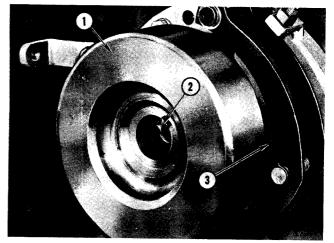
REMOVING BRAKE AND KEY 1. Brake Drum 2. Key 3. Brake Shoe
